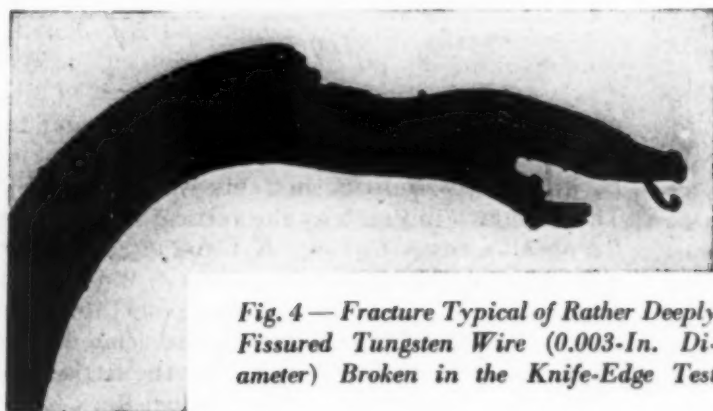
Fracture Typical of Rather Deeply Fissured Tungsten Wire (0.003-In. Diameter) Broken in the Knife-Edge Test
